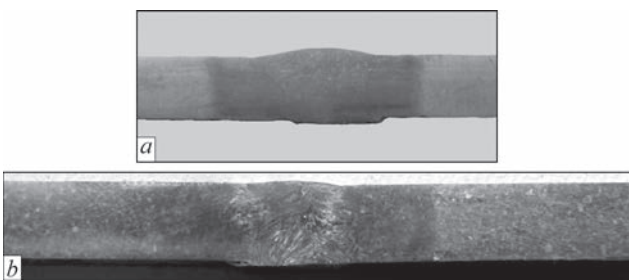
Transverse macrosection of a welded joint of high temperature titanium alloy Ti–6.5Al–5.3Zr–2.2Sn–0.6Mo–0.5Nb–0.75Si produced by: *a* — TIG welding; *b* — A-TIG welding
